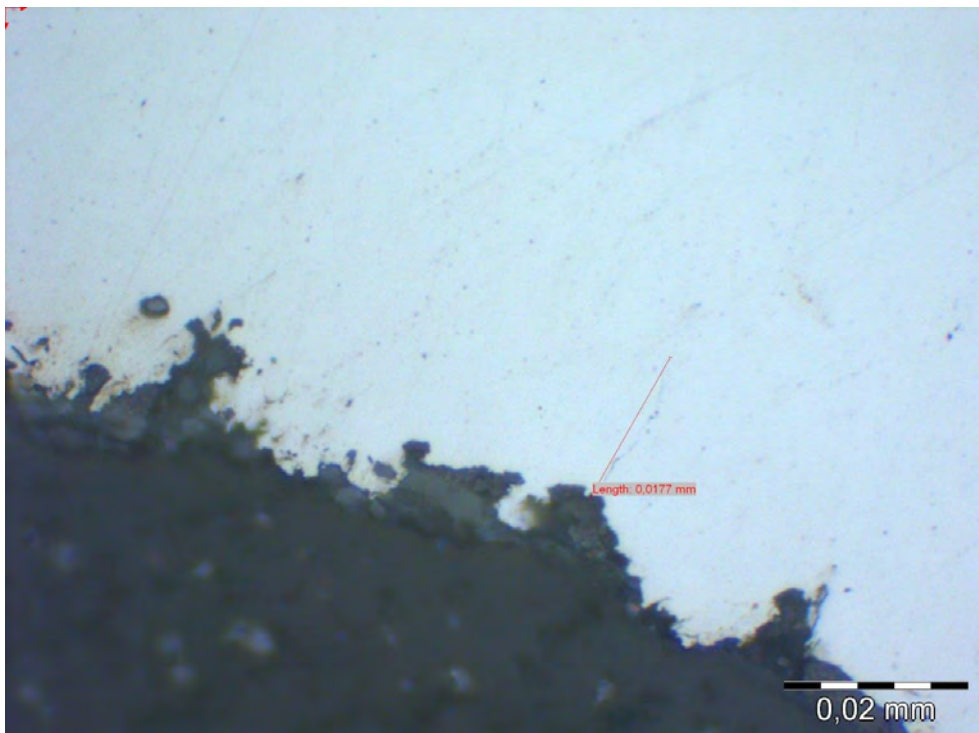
Cut three in crack at segment A, third ridge on barrel no. 14389
